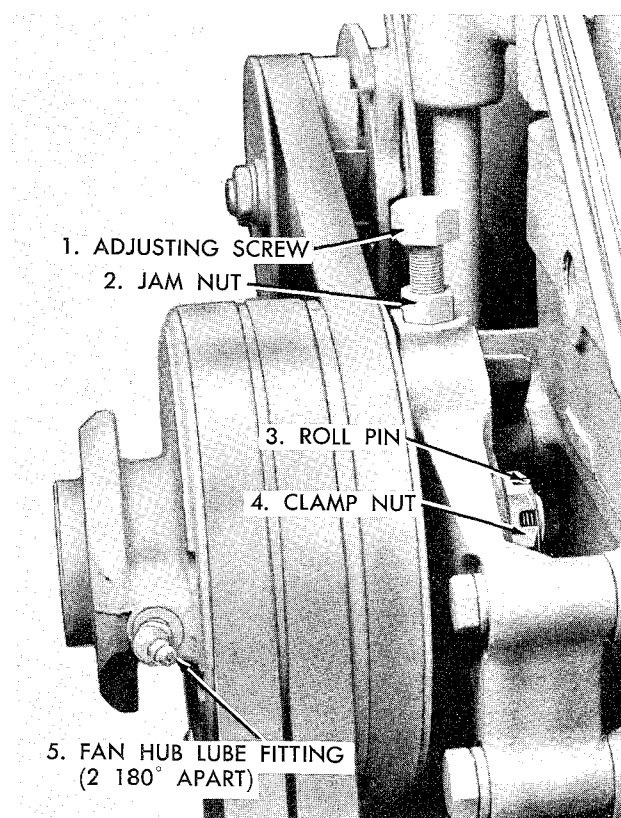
Fan to Crankshaft Drive Belts Adjustment (Fan Blades Removed) (T-28733)
